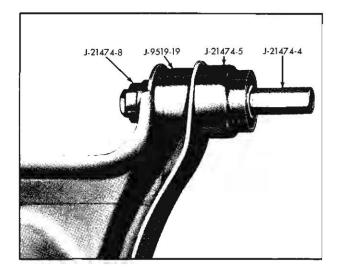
Removing Rear Bushing from Front Lower Control Arm
